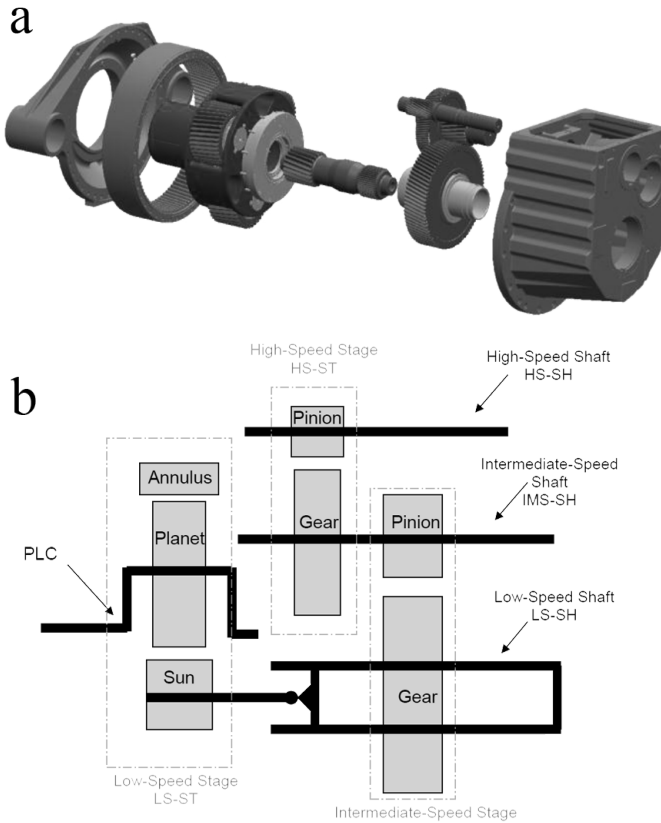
(a) View of internal components of the test gearbox. (b) Internal nomenclature and abbreviations of the test gearbox.
